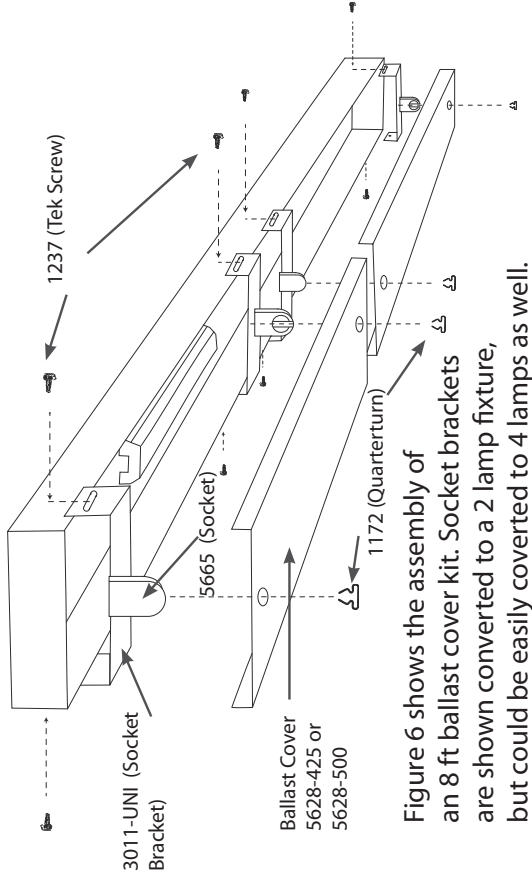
shows the assembly of an 8 ft ballast cover kit. Socket brackets are shown converted to a 2 lamp fixture, but could be easily converted to 4 lamps as well.
